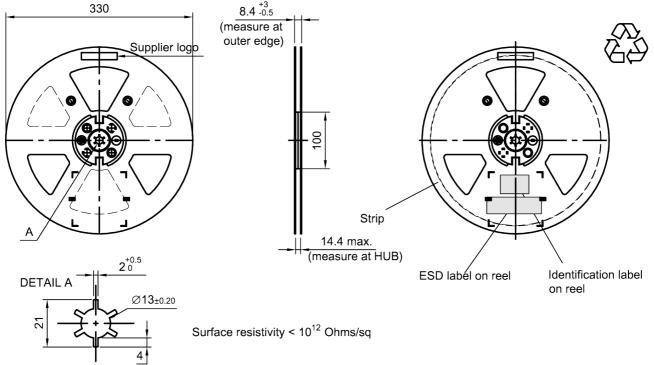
Drawing of reel (first-angle projection) with diameter of 330 mm.
